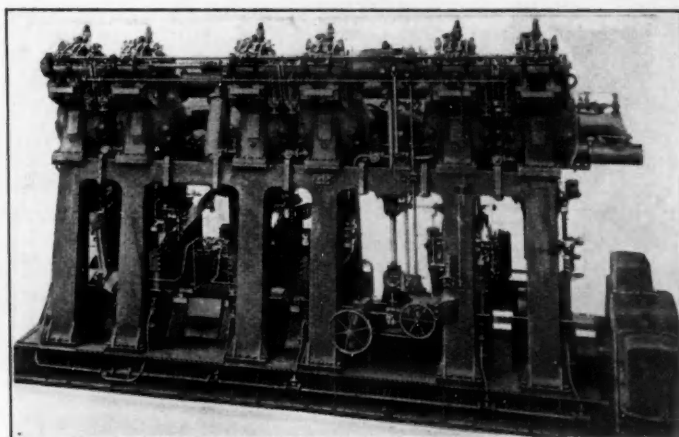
A BELGIAN TWO-CYCLE CROSSHEAD-TYPE ENGINE EQUIPPED WITH VALVE-IN-HEAD CYLINDERS
